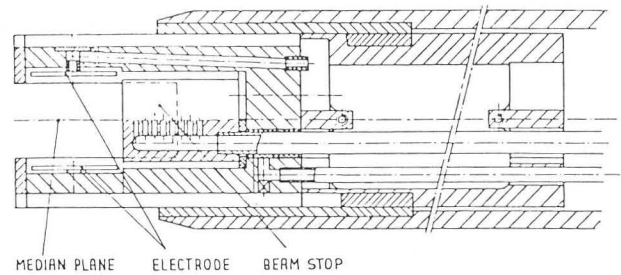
Longitudinal cross section of the beam probe head, showing pick-up electrodes and beam stop.
